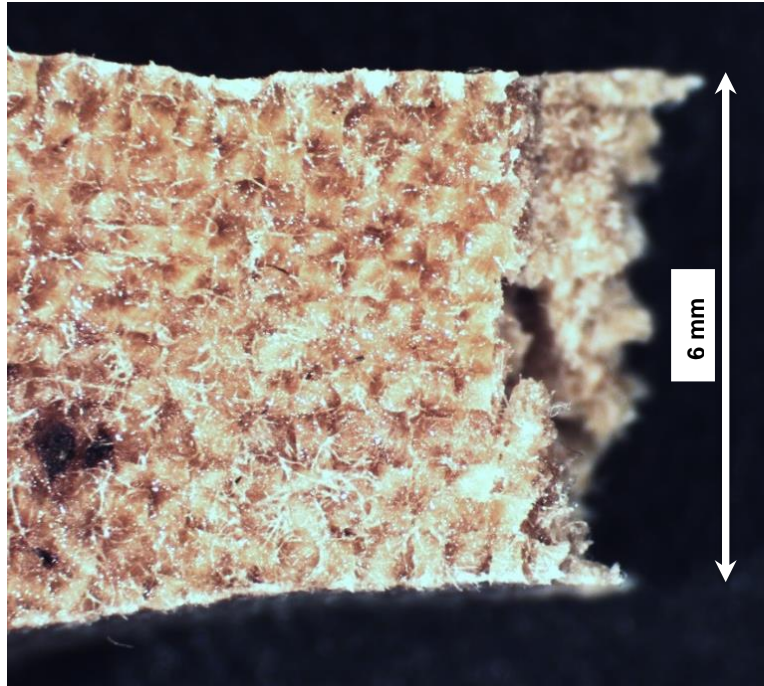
Side-on tensile fracture surface of reinforced MACOPS
